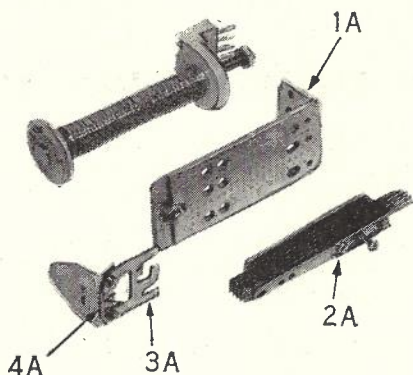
New RAF Relay showing Two Hole Mounting (1A), Channelled Springset Top Plate (2A), Springset Lifting Tongue (3A), and Straight Lifting Armature Pressure Adjusting Tongue (4A).
